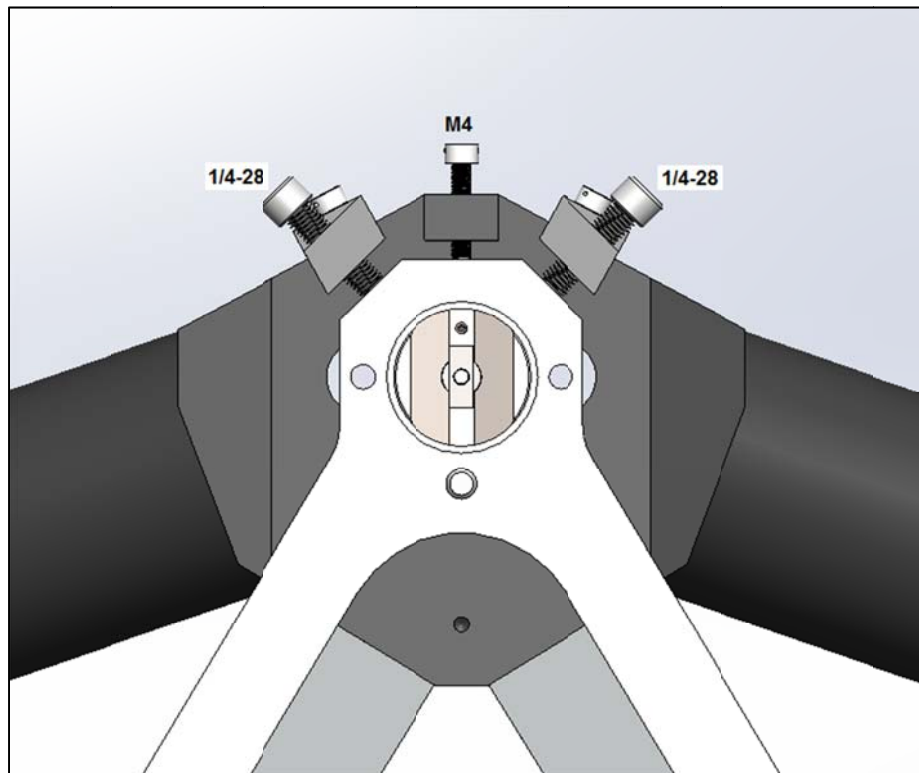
Groove Lock on axis position components. Note that Swing-Arm is M4 and Groove Lock components are 1/4-28. Hardware is drilled head for safety wire after final alignment.
